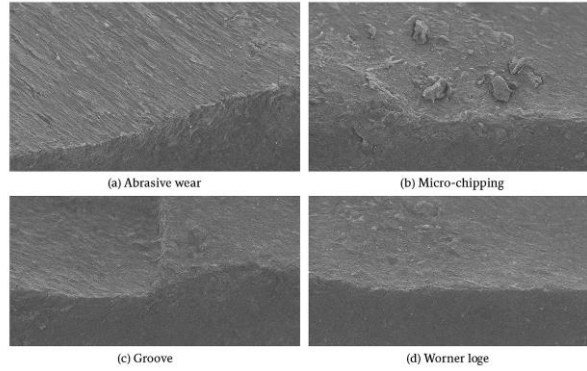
SEM Micrographs Showing Tool Wear Mechanisms in Al-MMC Machining
